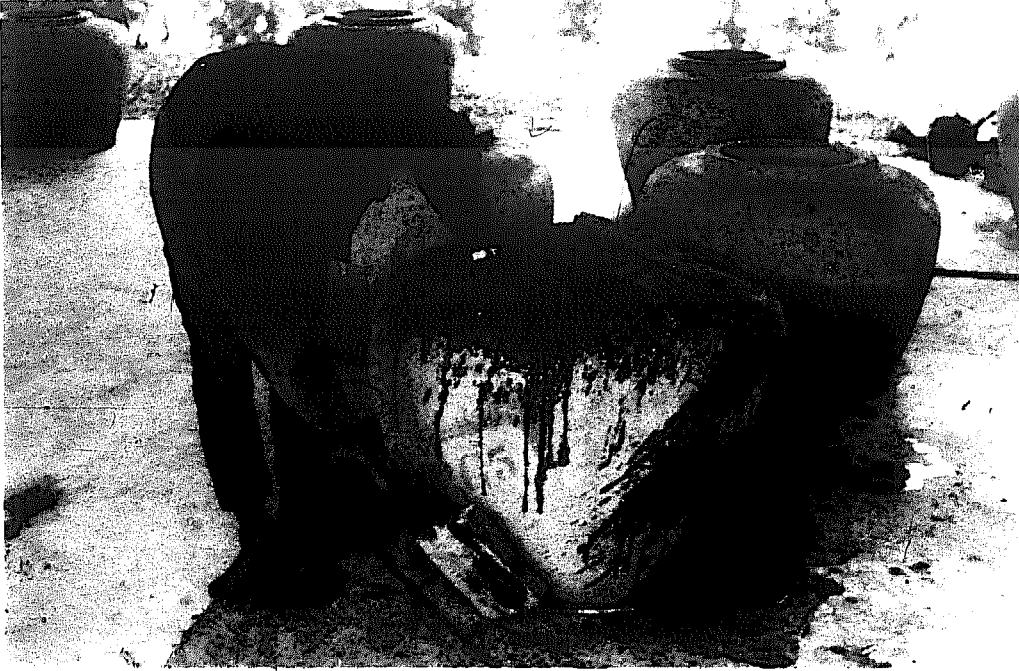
The upper part of the sack is folded to the shape of the traditional water jar. A piece of wood is used for tapping the mould to obtain a smooth surface
